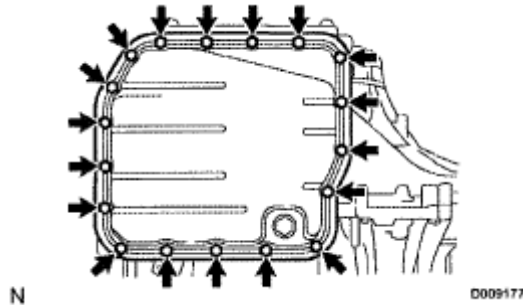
Locating Automatic Transaxle Oil Pan Bolts
